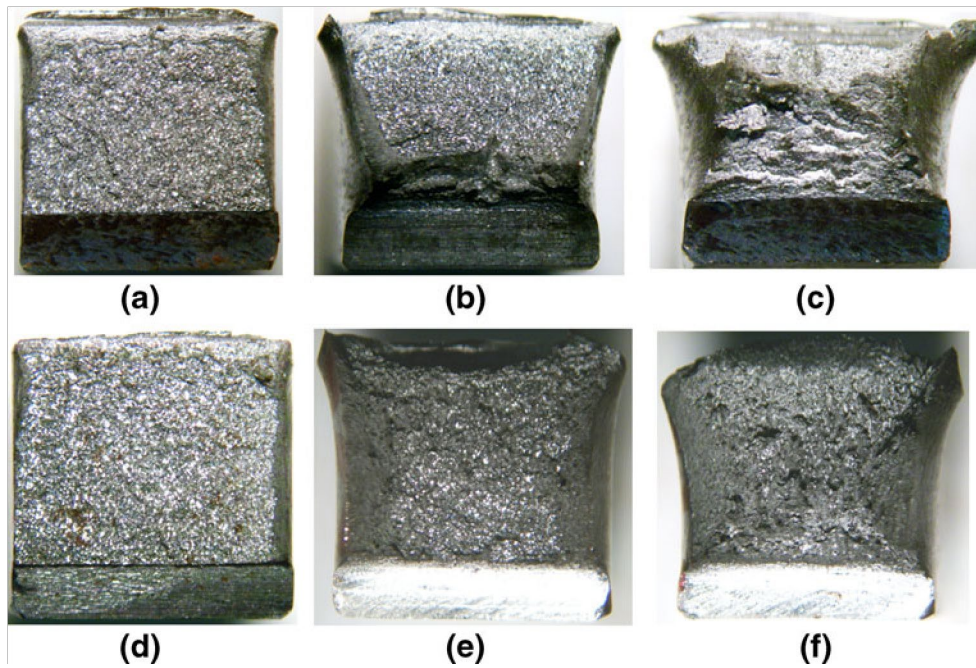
Macrographs showing the fracture surfaces of the S235 JR CVN specimens. As received condition: (a) -50 °C, (b) 20 °C, (c) 250 °C.
